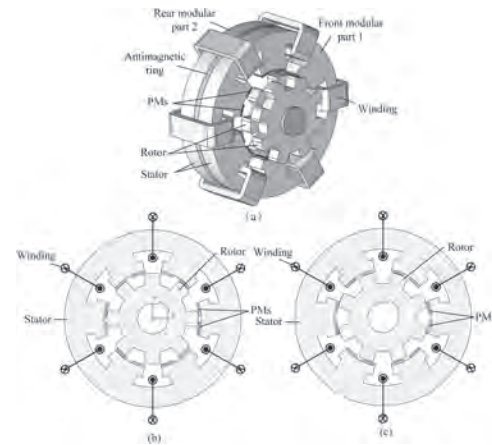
(a) The topology of AM-FRPM machine. (b) front modular part (c) rear modular part.
